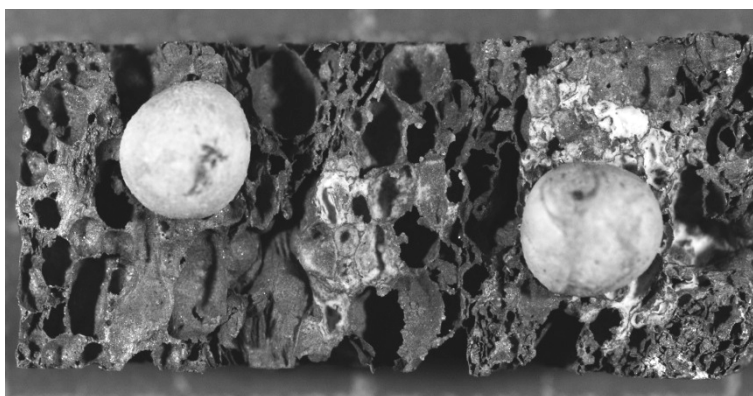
Surface of AlSi + SiC composite foam used for solder wettability investigation, ZnAl22 solder was used
